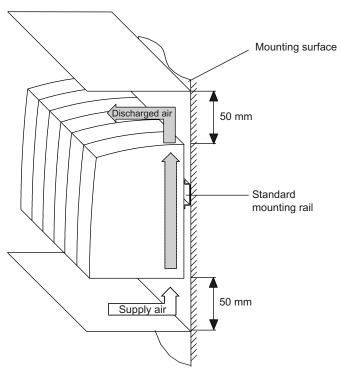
Cooling clearances for modules mounted on standard rails (e.g. SMC, DMC)
